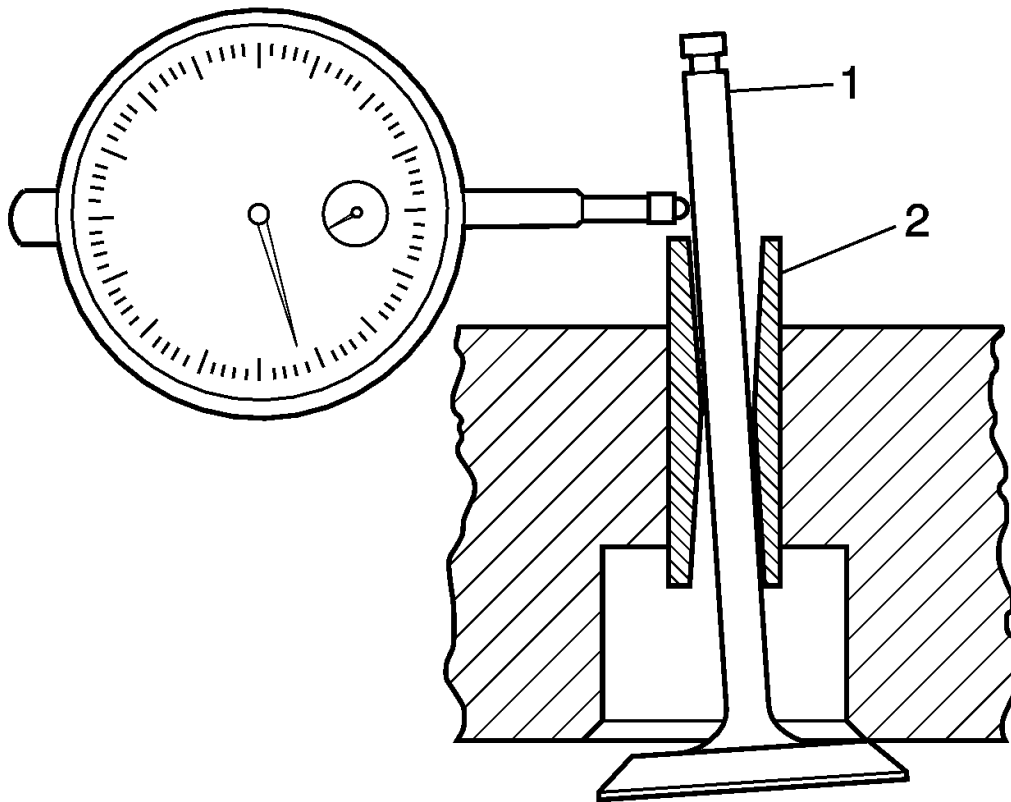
Inspecting For Excessive Valve Stem To Guide Clearance
